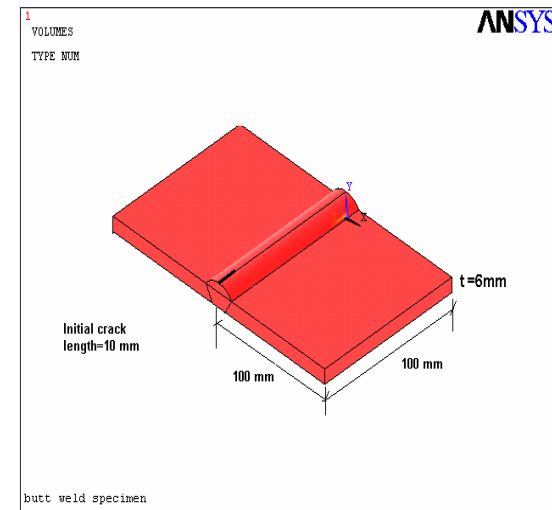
Butt welded specimen with initial crack of 10mm
